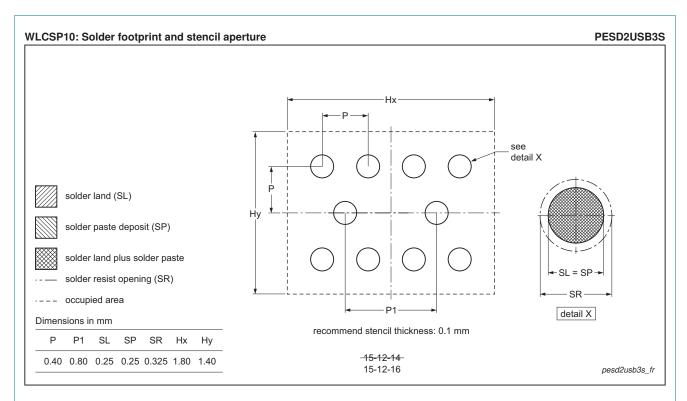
Soldering footprint WLCSP10 (PESD2USB3S)
